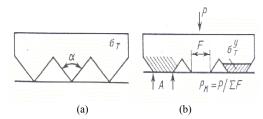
The scheme of physical contact formation under the compressive load (P): a – before welding; b – during welding [2]
